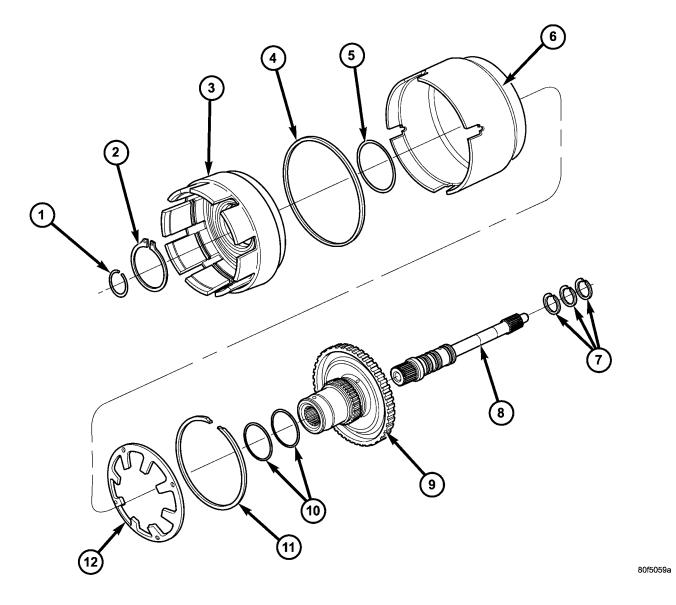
Input Clutch Hub, Retainer, and OD/Reverse Piston
